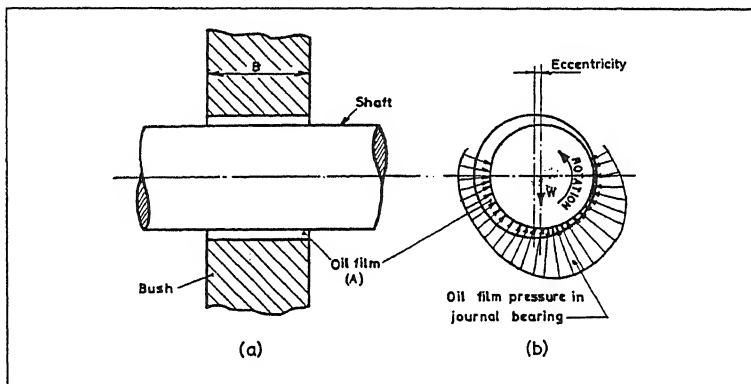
Journal bearing (a) front view indicating shaft, bush and the oil-film. (b) cross-section in the side view indicating the pressure developed in the oil-film and the relative positions of shaft and bush when the shaft is rotating.
